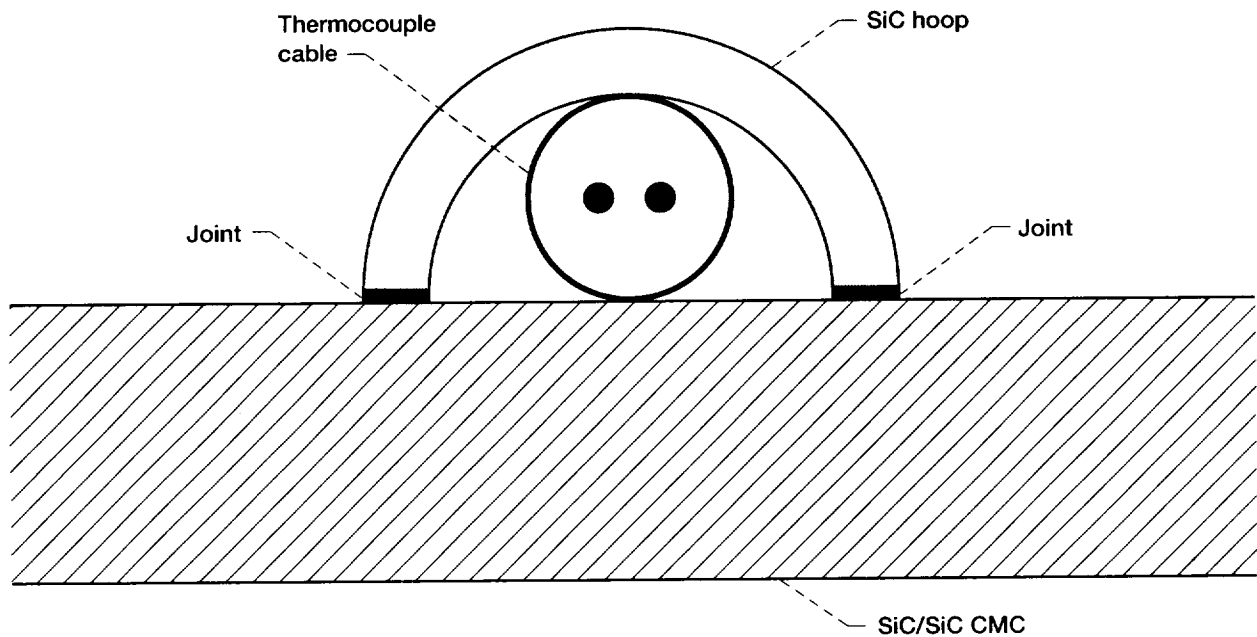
Schematic showing a cross sectional view of the thin SiC hoop attachment approach for positioning lead wired cables on SiC/SiC CMC subcomponents.
